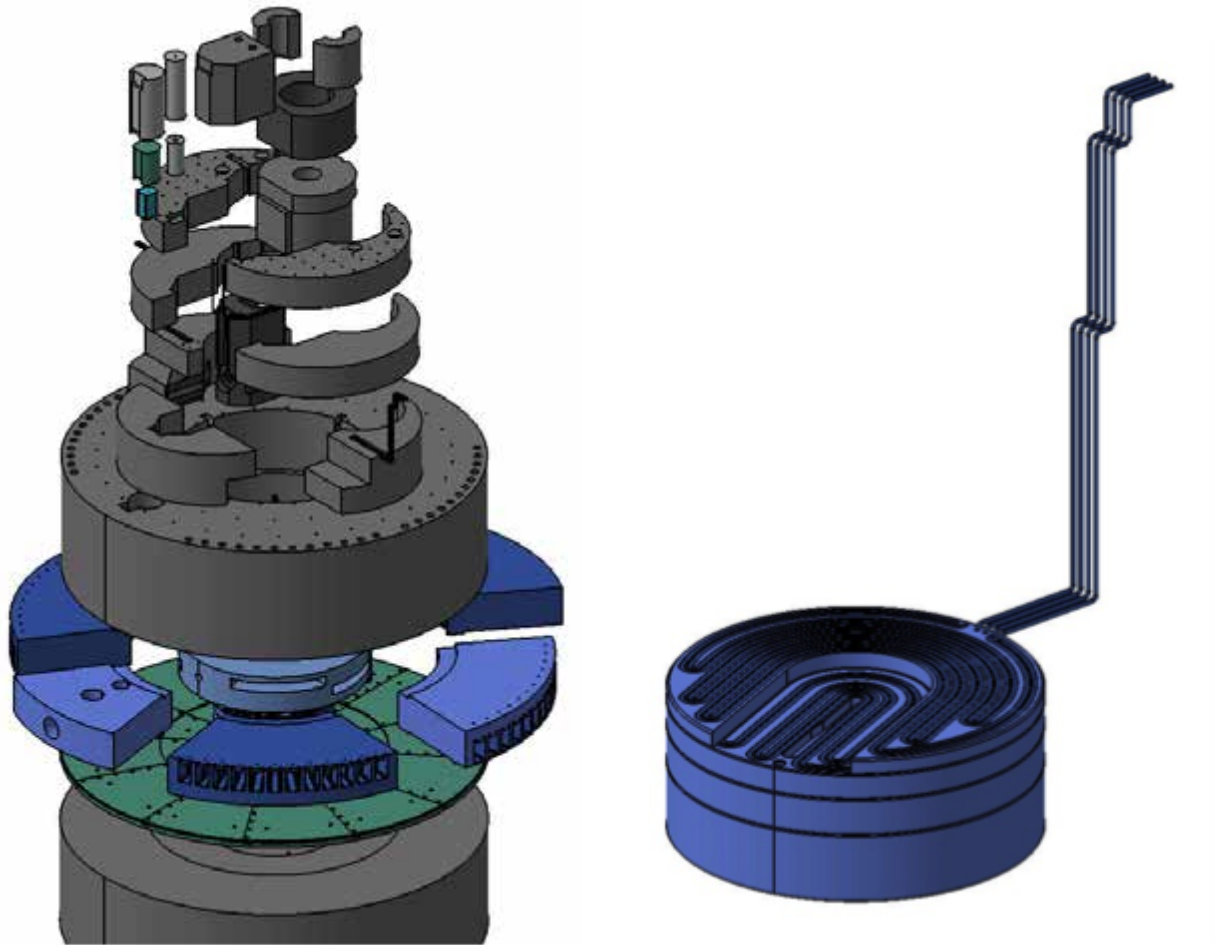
Left: Exploded view of the bulk shielding assembly. Right: The water-cooled shielding block.
